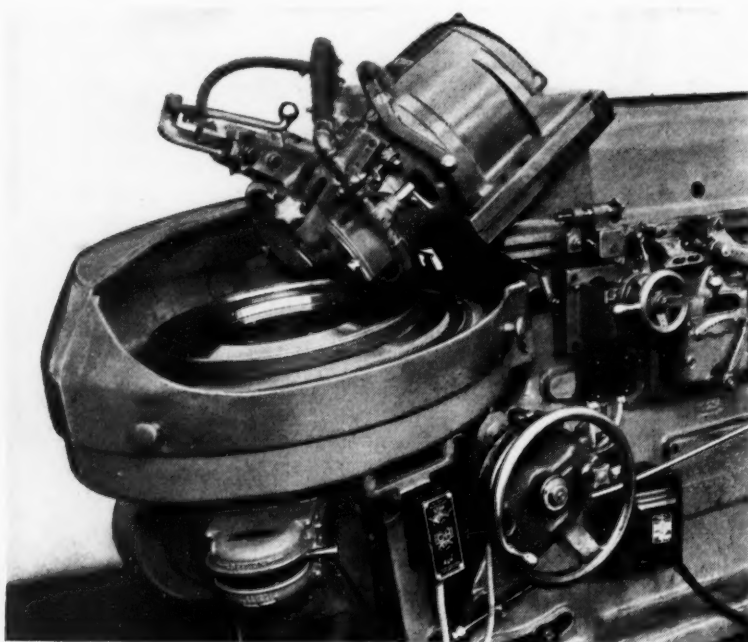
Set-up for Grinding Surfaces A and B, Fig. 2, at One Setting of the Work
